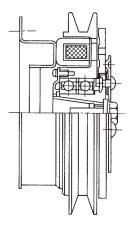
Electromagnetic clutch for a reciprocating type compressor
